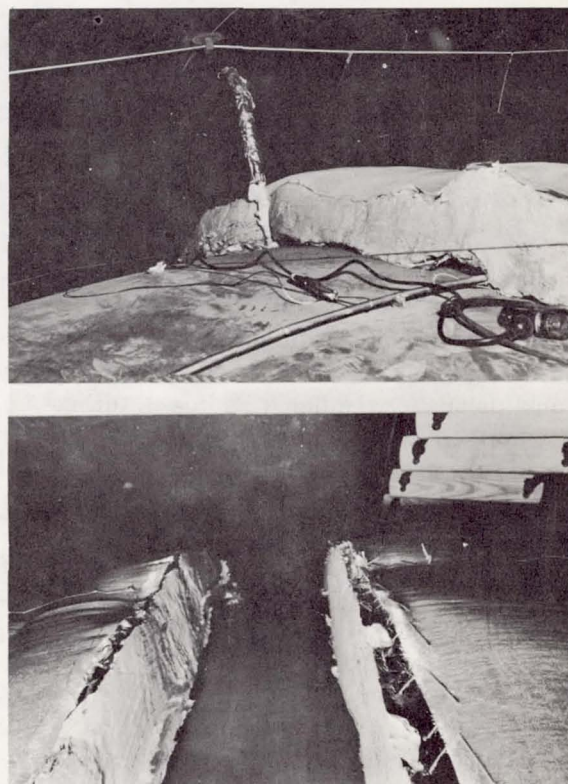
Application of multilayer insulation to ground storage tank.
